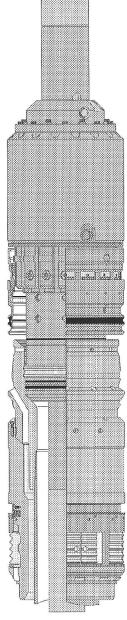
Running Tool, Seal Assembly, and Casing Hanger made up as a unit
